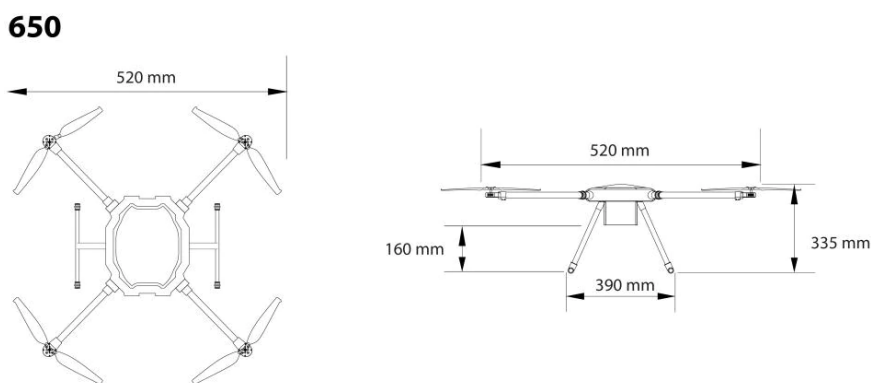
Technical drawing of the Tarot T650 drone from [12]
